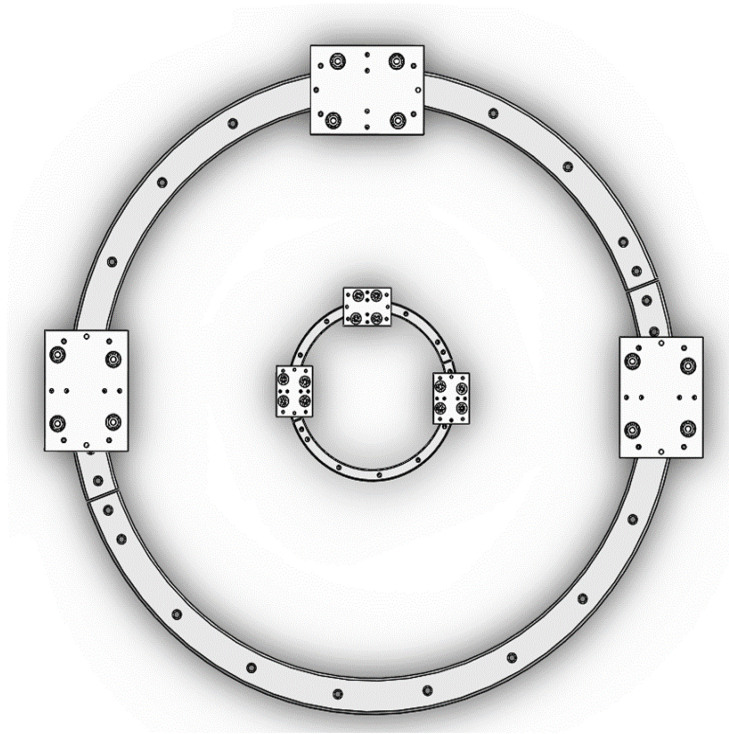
Initial Solidworks design model of subsystem 3: track and cart assembly.
